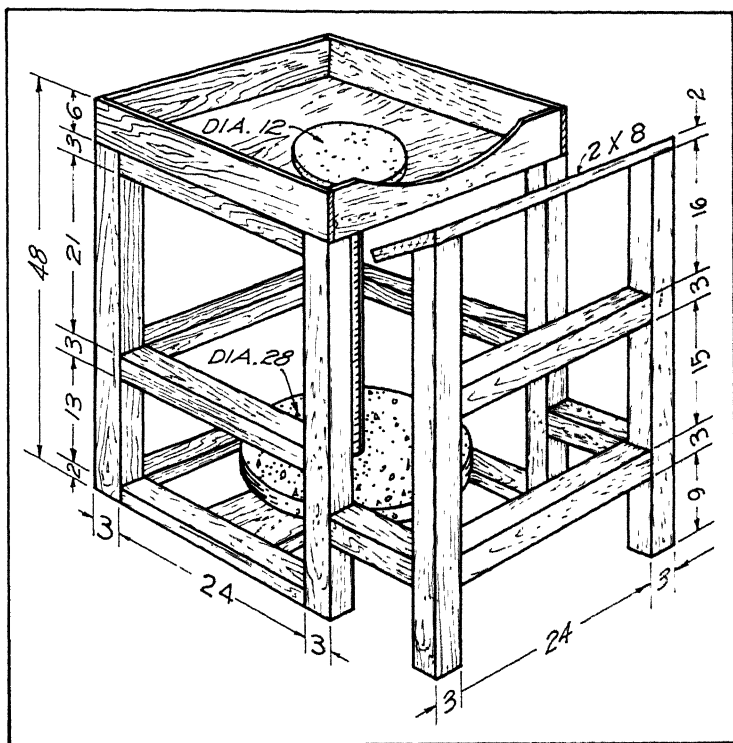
This simple kick wheel can be cheaply made, and is excellent for turning and trimming pieces. It also can be adapted to platemaking. The frame can be made from 3 by 3-in. stock. The upper bearing is a roller bearing and the lower a thrust bearing from a discarded automobile.
